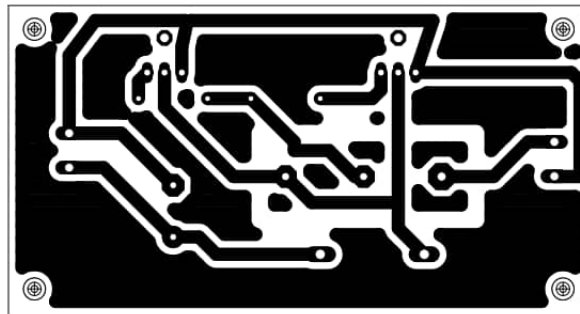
Shows the PCB etching revealing the desired circuit pattern.
